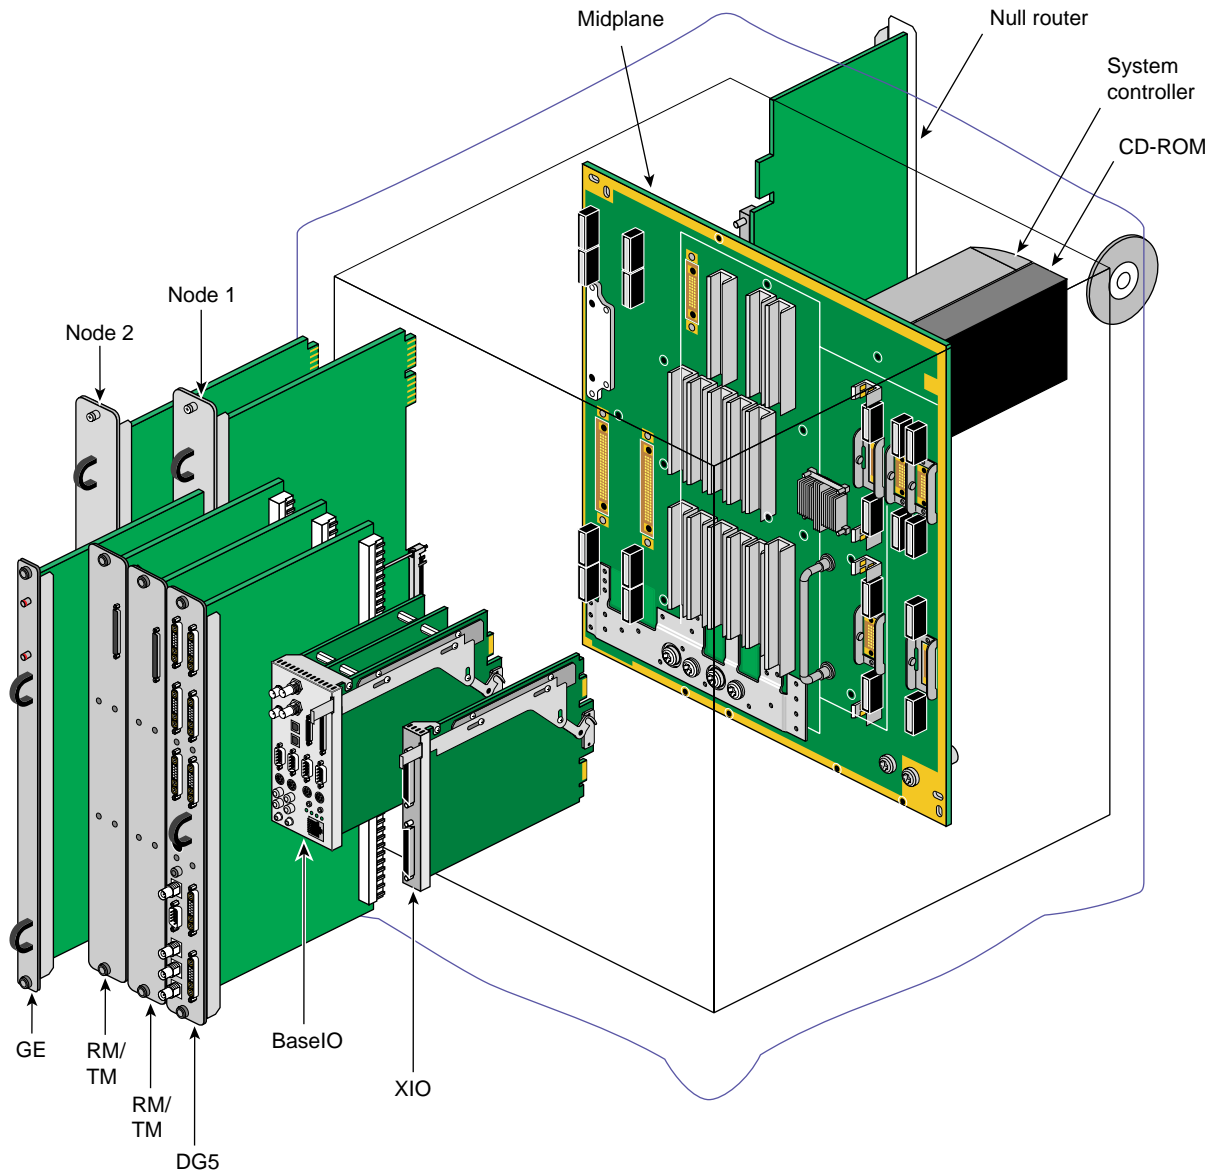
Onyx2 Deskside Chassis (Partial Exploded View)
